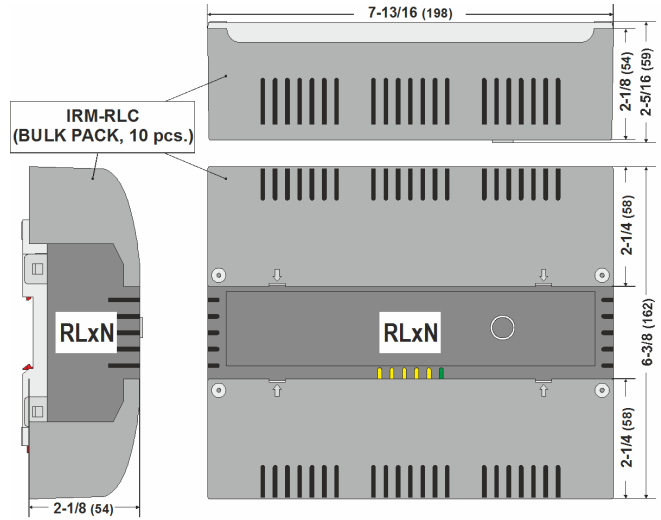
Large housing, with terminal protection covers, dimensions in inch (mm)
